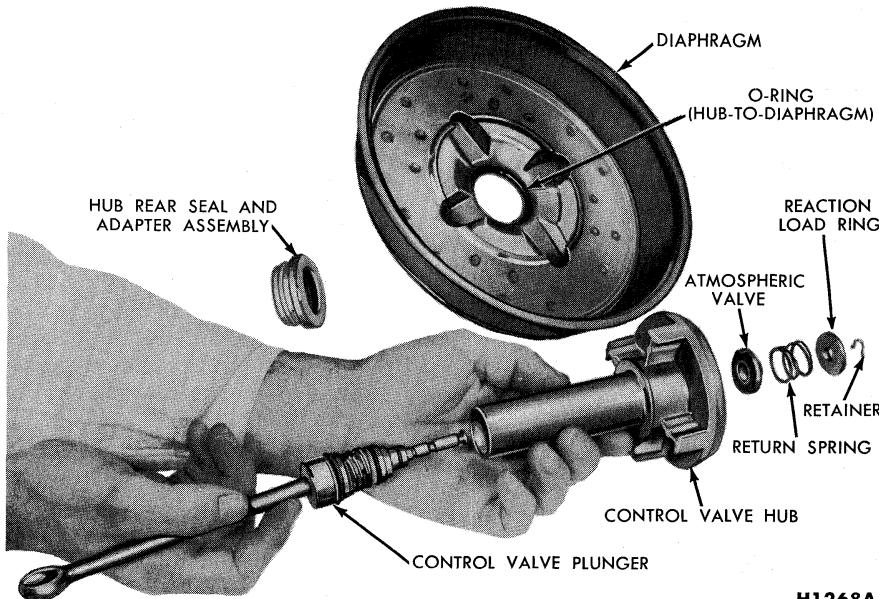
Disassembly or Assembly—Control Valve Components-to-Hub and Diaphragm
